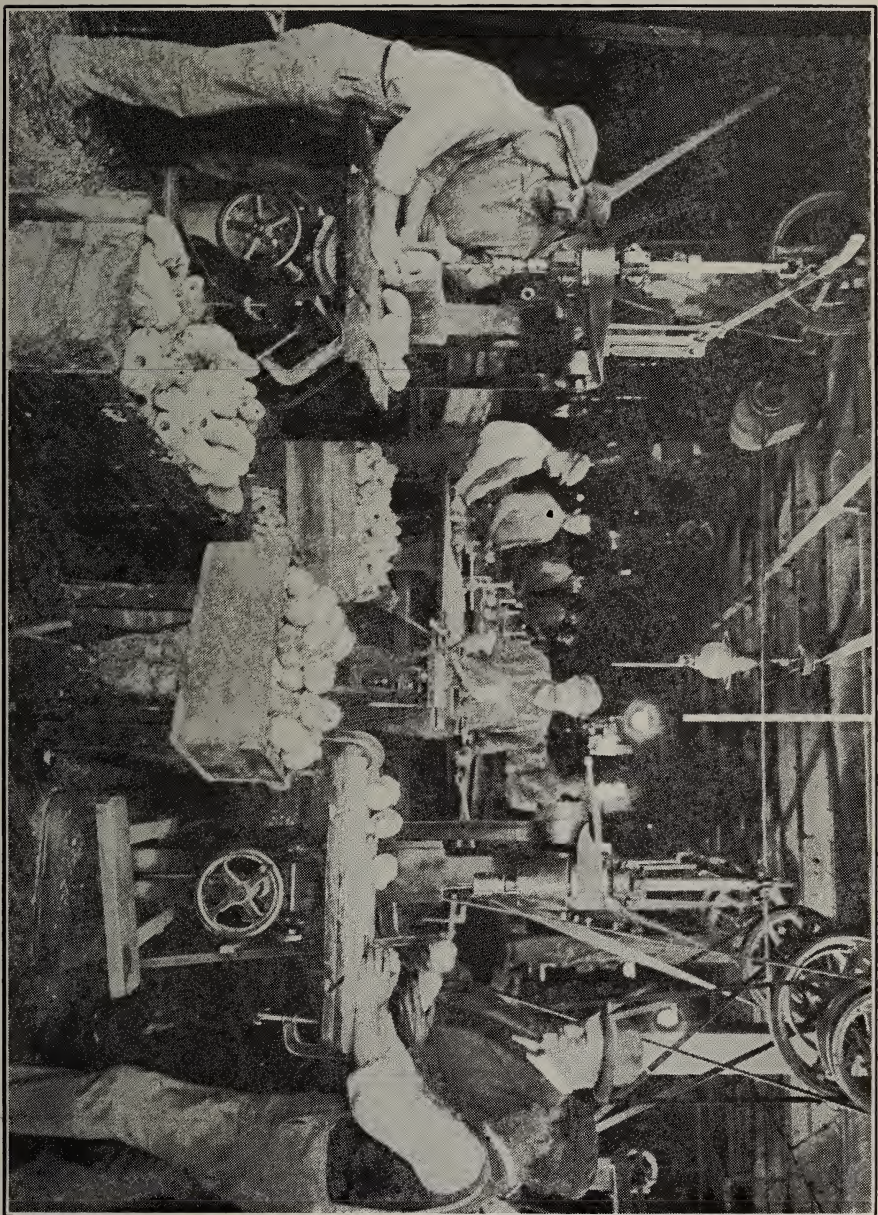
Woodworking department of a toy manufacturer. Making wooden dolls.
